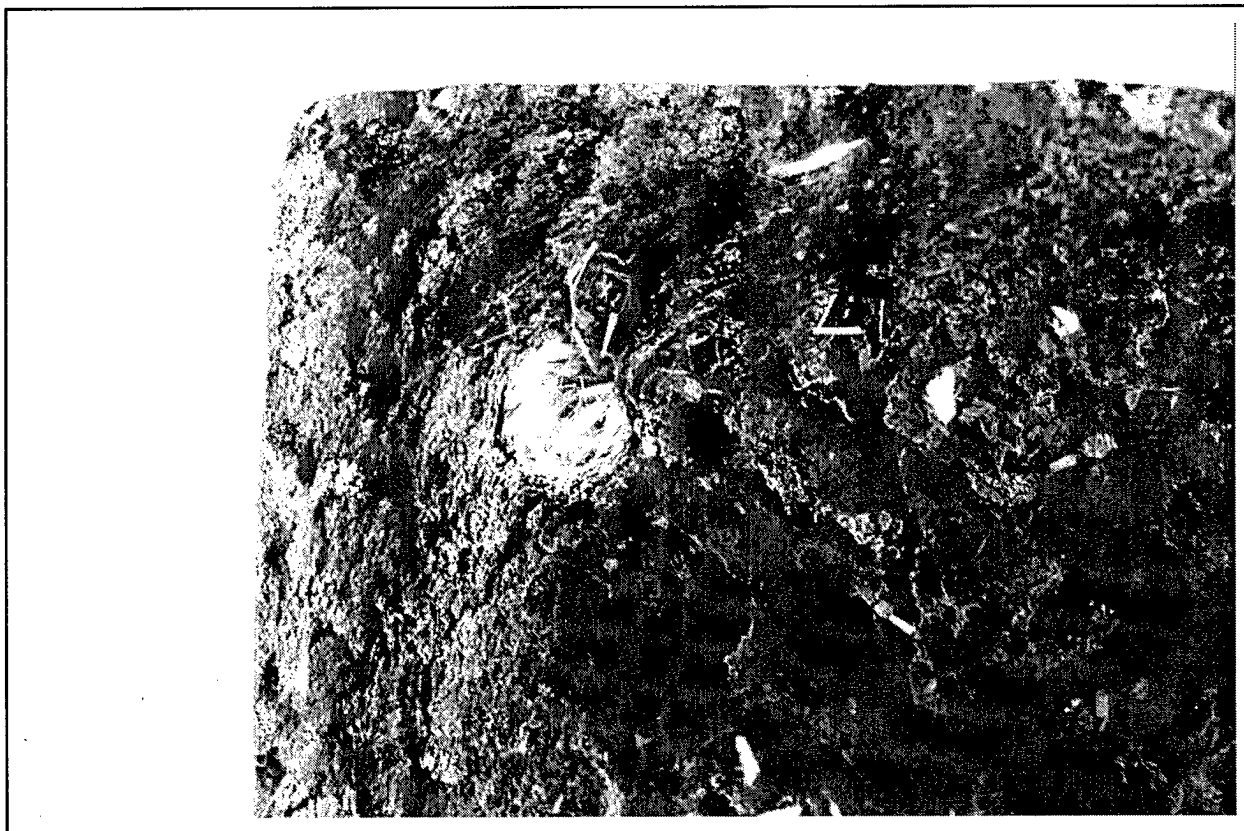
End view of cracked arch section showing stress riser of unwetted fiberglass.
